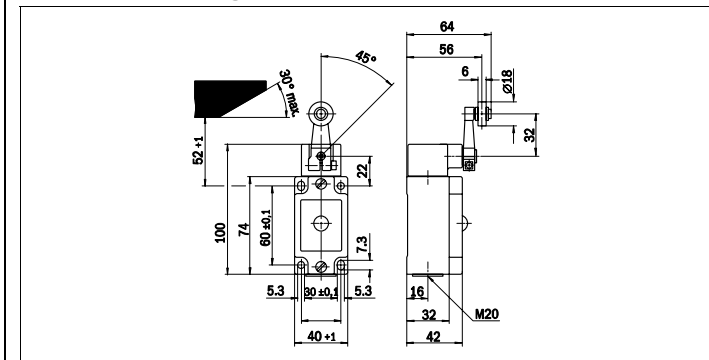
Dimensional drawing i100R (for turning lever with steel roller)
